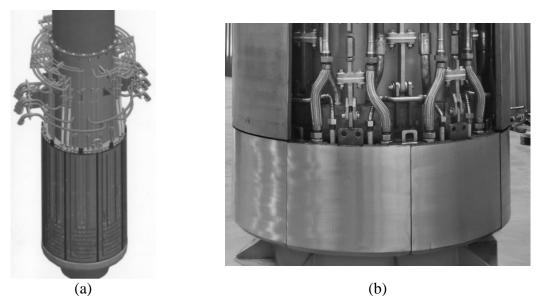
(a) Tenova Pyromet's Lower Electrode Assembly and (b) View of the Contact Shoes within the Heat Shield of the Lower Electrode Assembly
